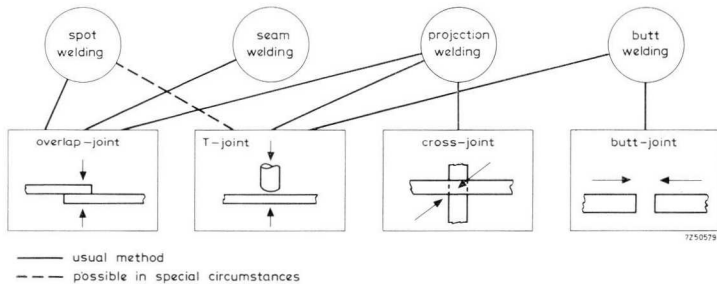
Representation of resistance welding methods suitable for making different types of joints.
